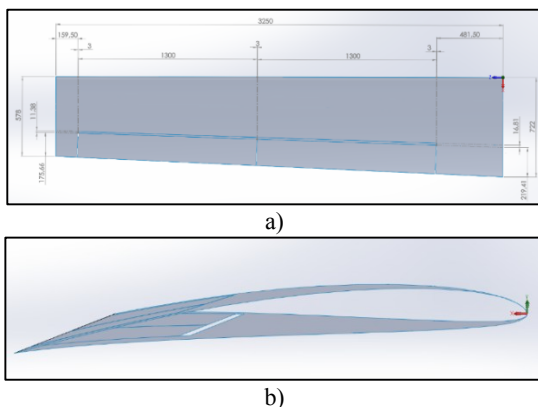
Wing's surface geometry (2D shells): a) Half-wing top view; Half-wing side view (root).
